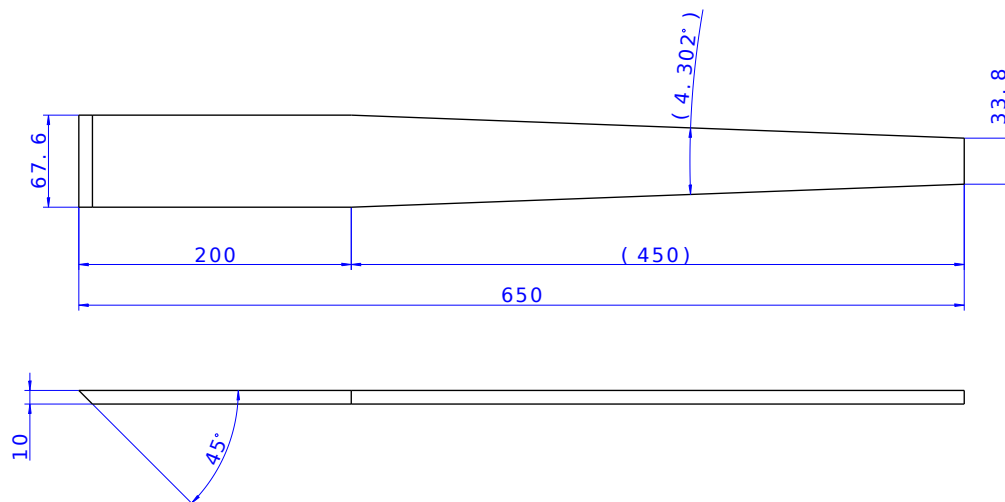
Technical drawing of a fused silica bar used as Cherenkov medium in P2. Dimensions in units of mm.
